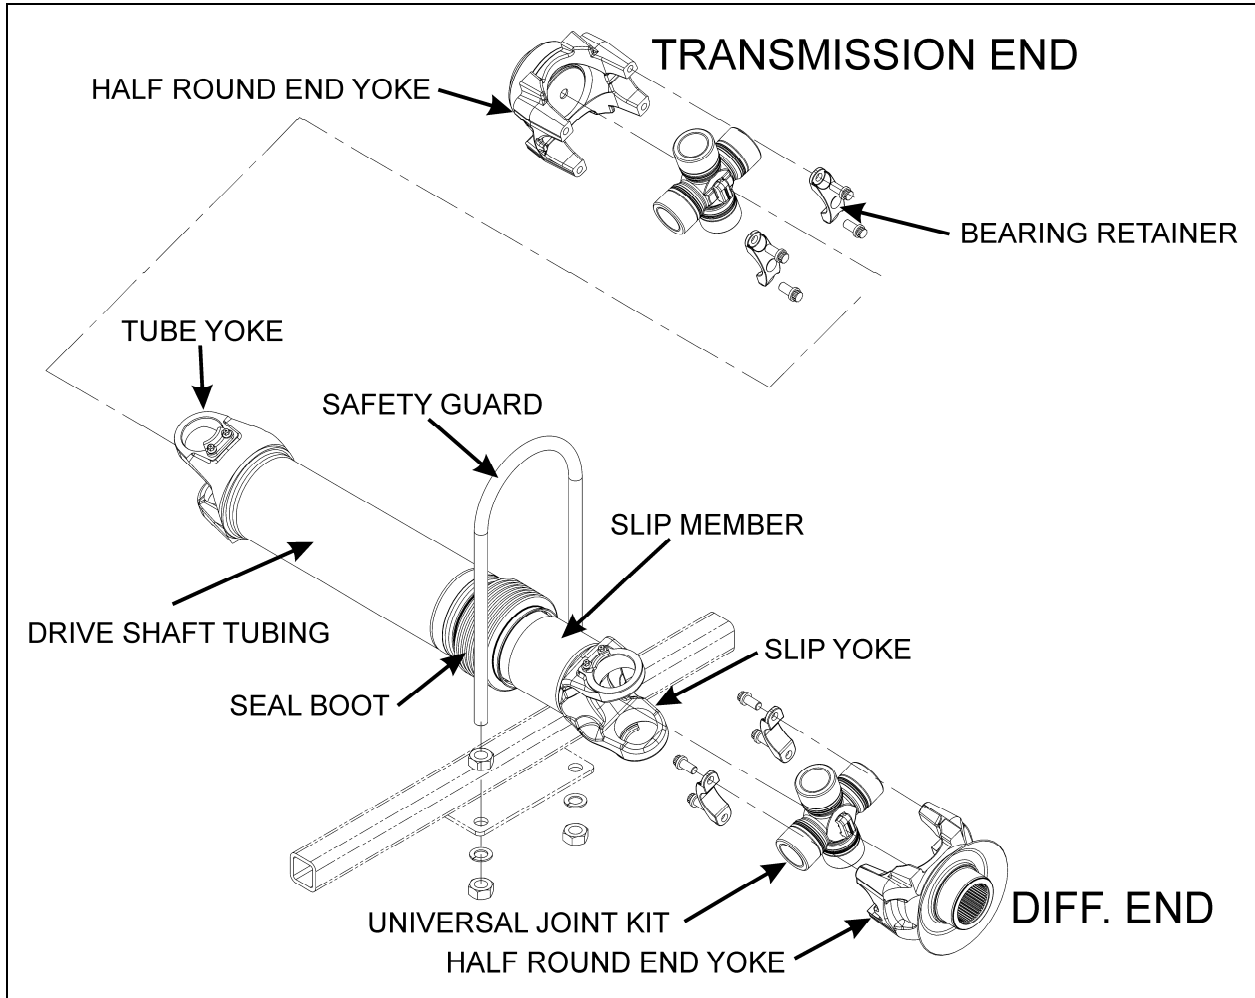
PROPELLER SHAFT ASSEMBLY
